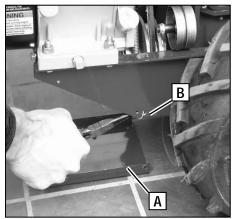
Remove transmission cover and unhook reverse idler spring.
